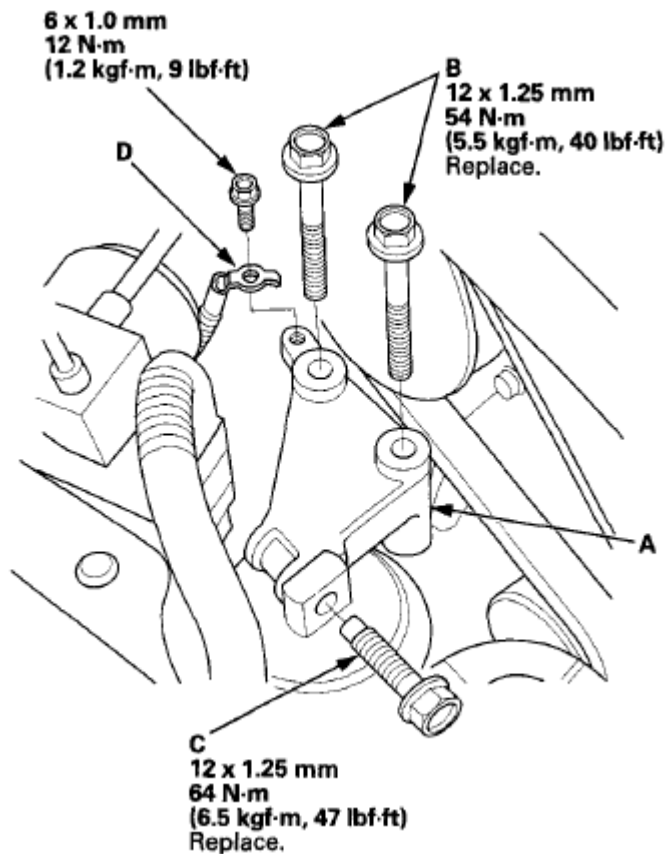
Installing Upper Half Of Side Engine Mount Bracket With Torque Specifications
